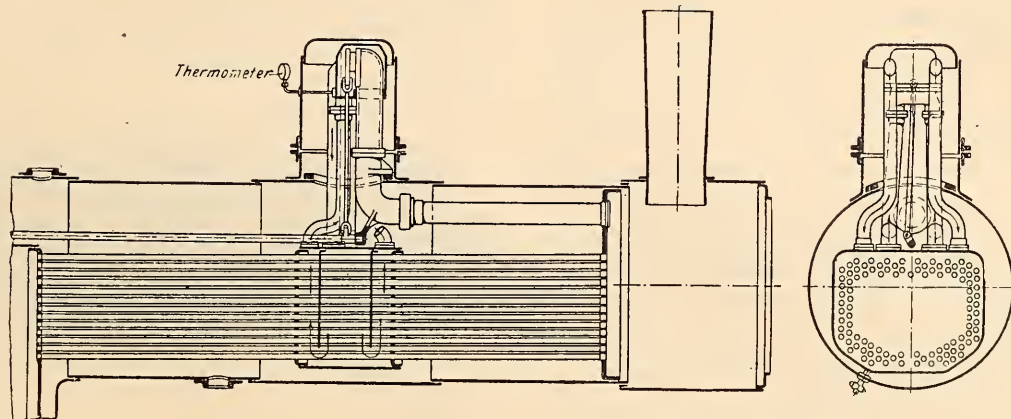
PIELOCK SUPERHEATER APPLIED TO LOCOMOTIVE BOILER.
